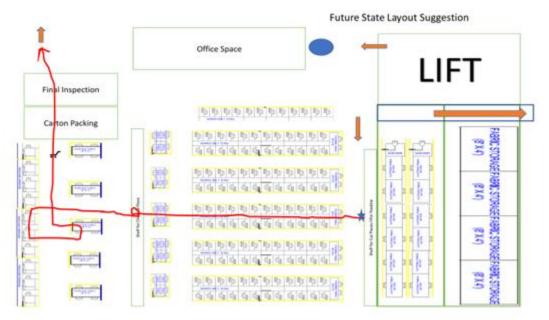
Suggested New Layout: 120 Machines layout. (Material Movement 88ft.)
